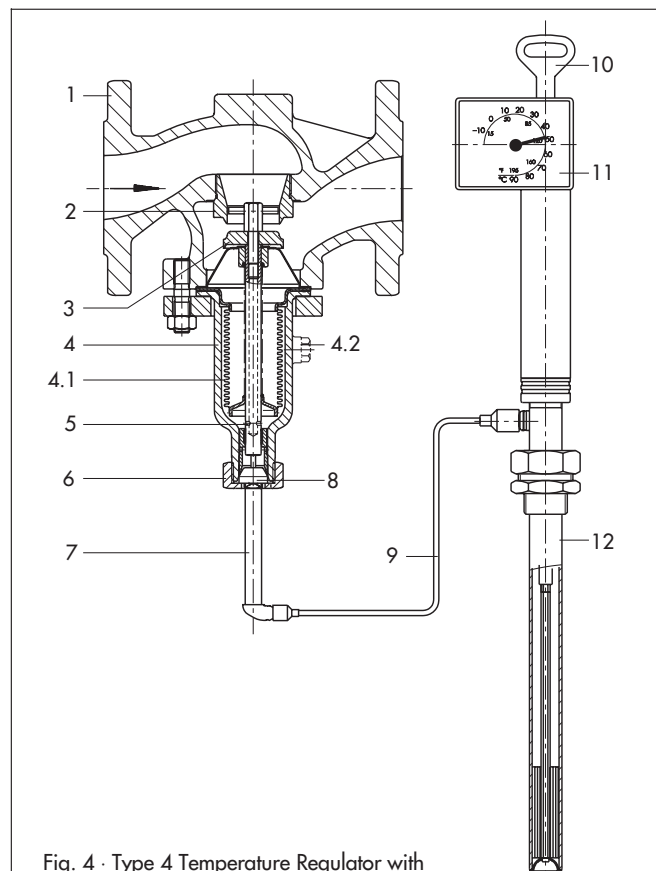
· Type 4 Temperature Regulator with Type 2114 Valve and Type 2231 Thermostat
